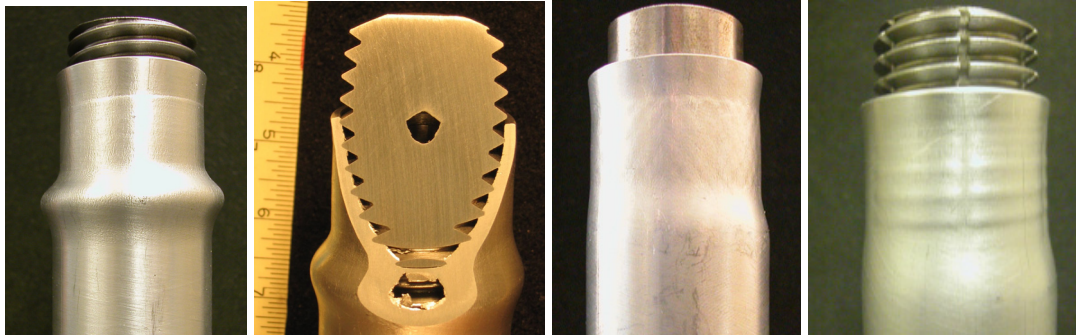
Examples of crimp joints based on surface impression. From left: joint based on a 25.4 mm coarse screw thread tested in compression (14 kJ impulse onto a coarse thread screw); angled cross section of similar joint; a joint based on a knurled mandrel
